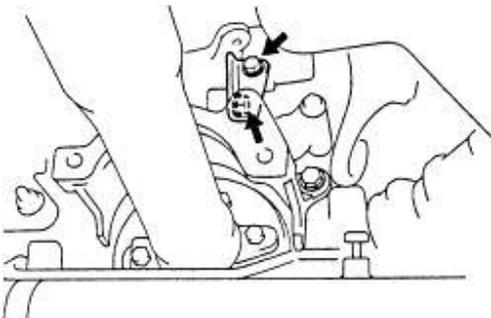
Unbolt and extract the No. 1 intake air connector bracket
